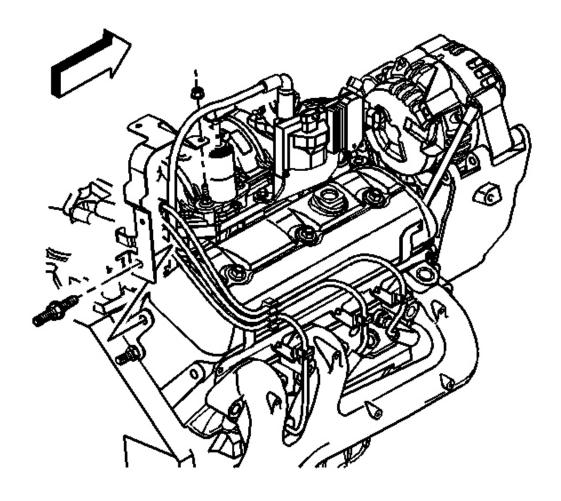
Engine Wiring Harness Rear Bracket Nut & Stud Holding Engine Wiring Harness Bracket
